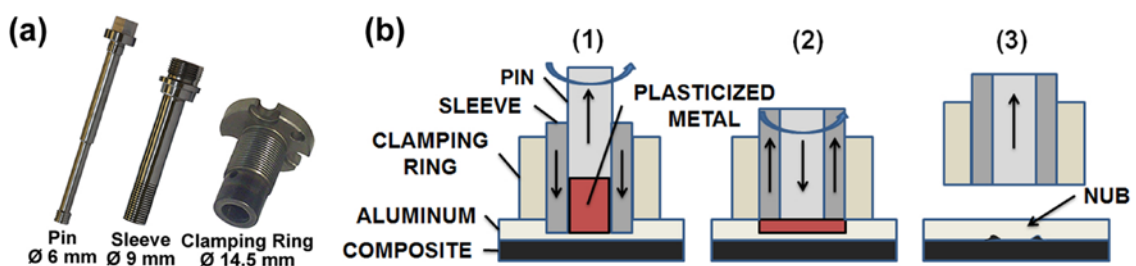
(a) FSpJ tool pieces used in this work. (b) Representation of the FSpJ process steps: 1 - Sleeve plunging into the metallic plate; 2 - Spot refilling; 3 - Joint consolidation under cooling.
